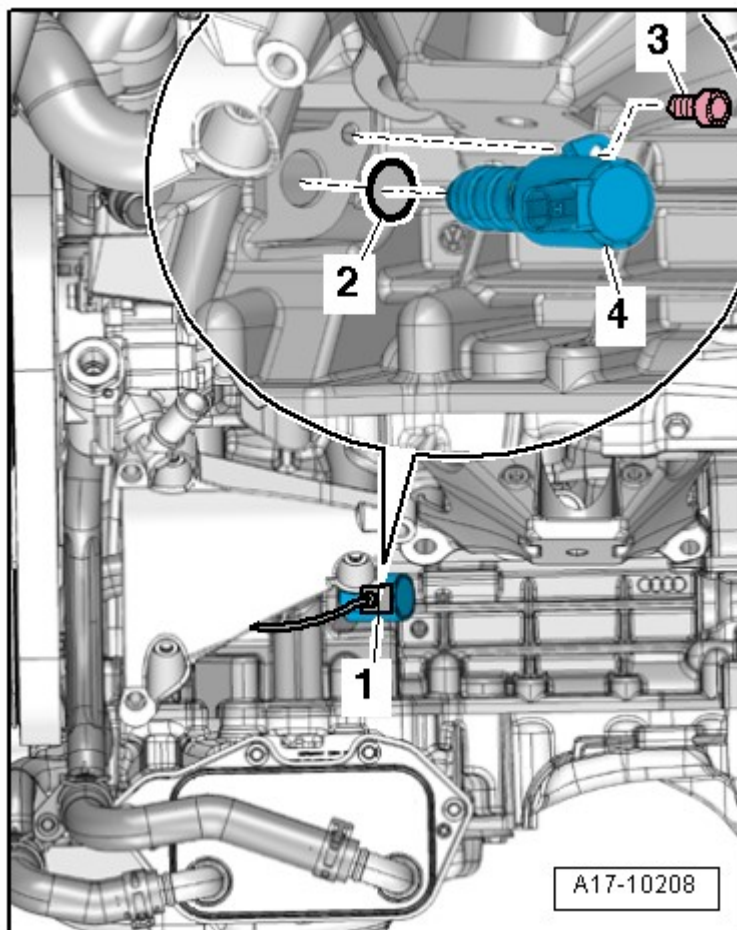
Identifying Oil Pressure Regulation Valve -N428-
